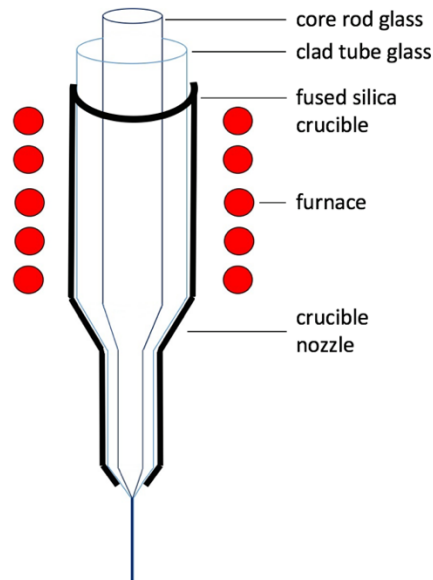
Fused silica crucible assembly used for fiber drawing.
